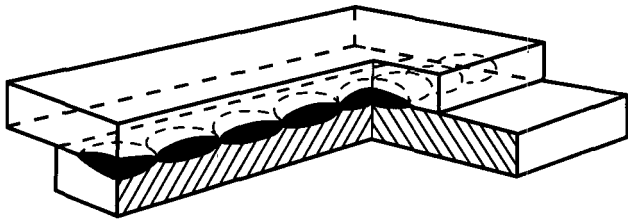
Resistance Seam Weld. The Overlapping Spot Welds Provide a Leak-Tight Seam.
